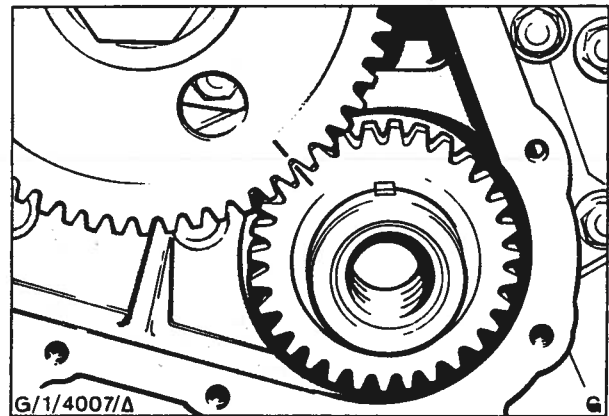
Camshaft and Crankshaft Gear Timing Marks in Alignment
